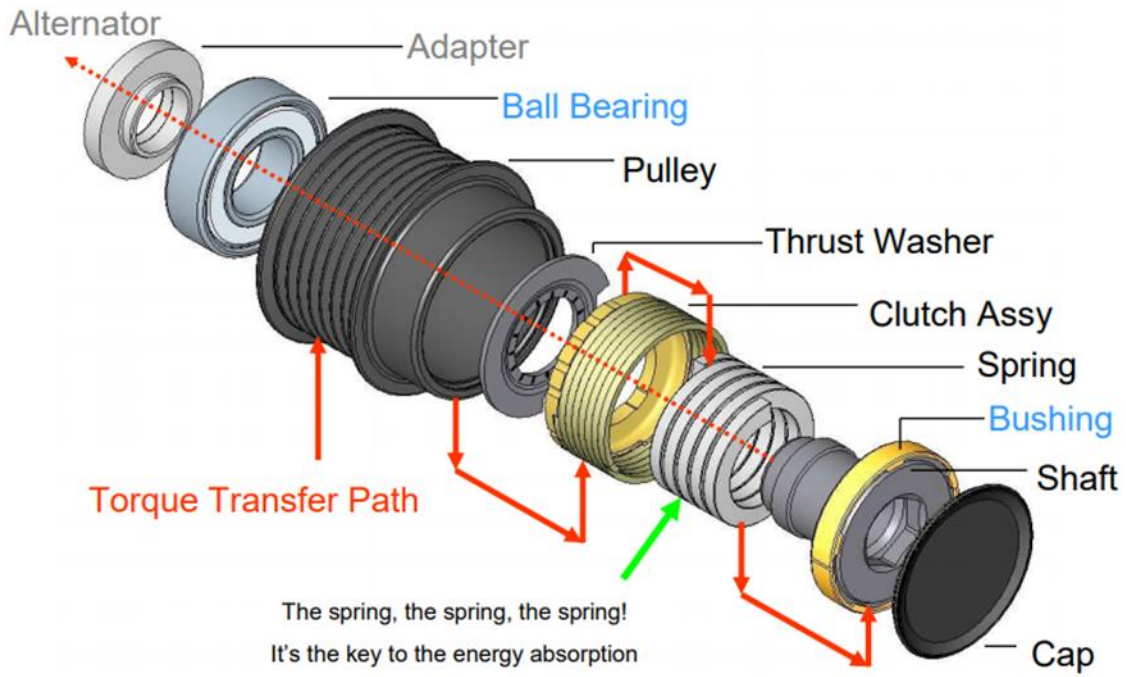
Schematic diagram of a typical OAD highlighting the major components including the bearing, pulley, clutch assembly, spring, thrust washer and bushing. Courtesy of Litens Automotive Group, Toronto, Ontario Canada.
